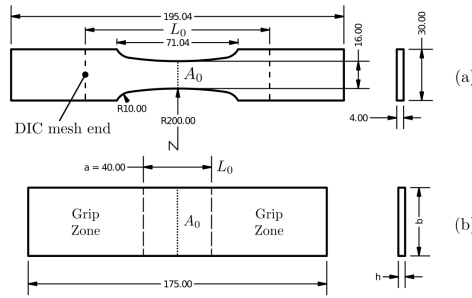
Specimen drawings in mm: (a) Tensile test specimen, (b) Buckling test specimen
